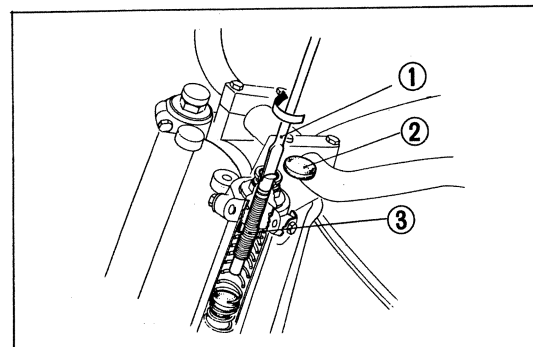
① Screwdriver ② Rubber cap ③ Adjuster
